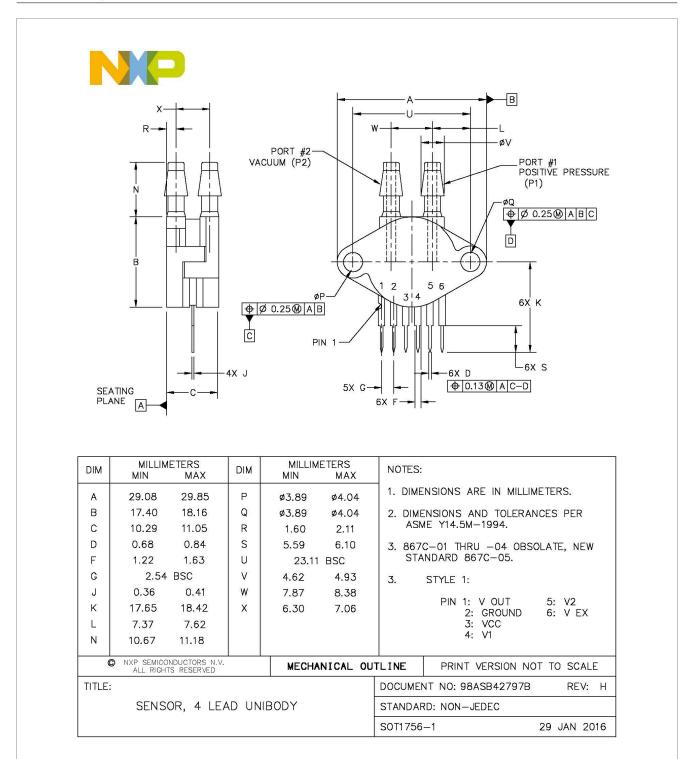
MPX5050DP - SOT17560-1 - Case 867C package outline ¹
